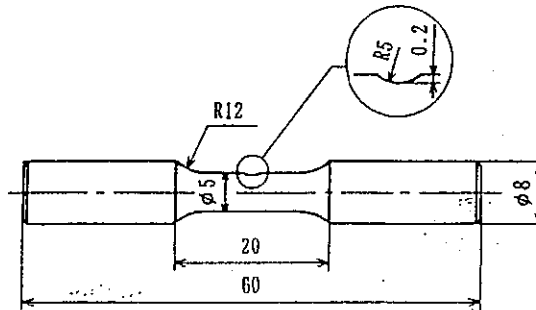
Shape and dimensions of specimen for fatigue tests. mm.
